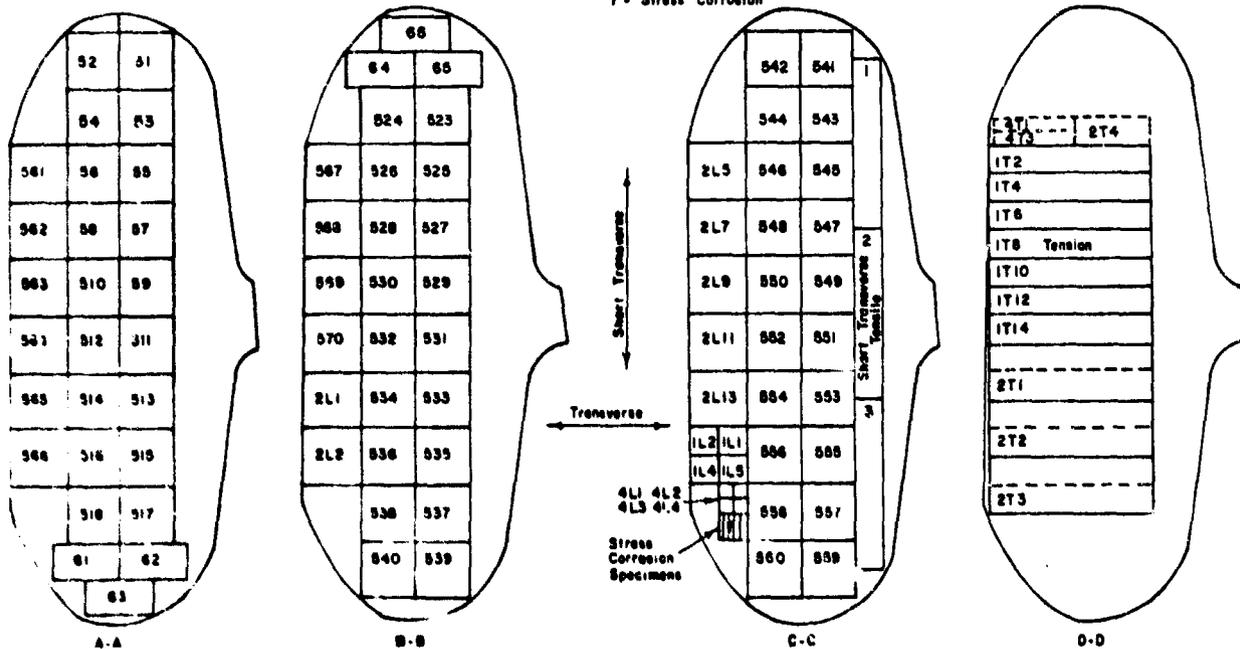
SPECIMEN LAYOUT FOR 300M FORGINGS
